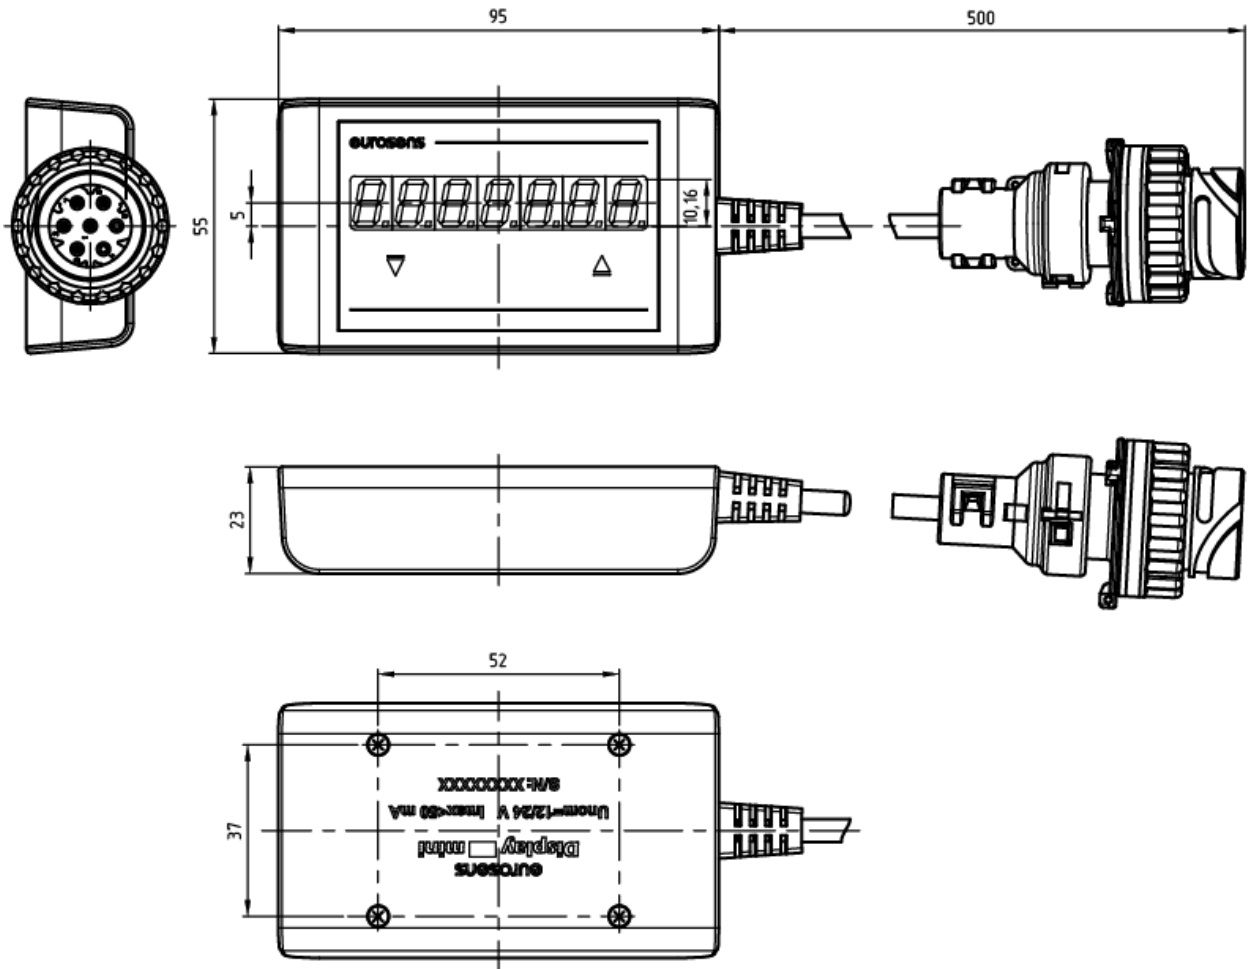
Overall dimensions of Display RS/CAN Mini
